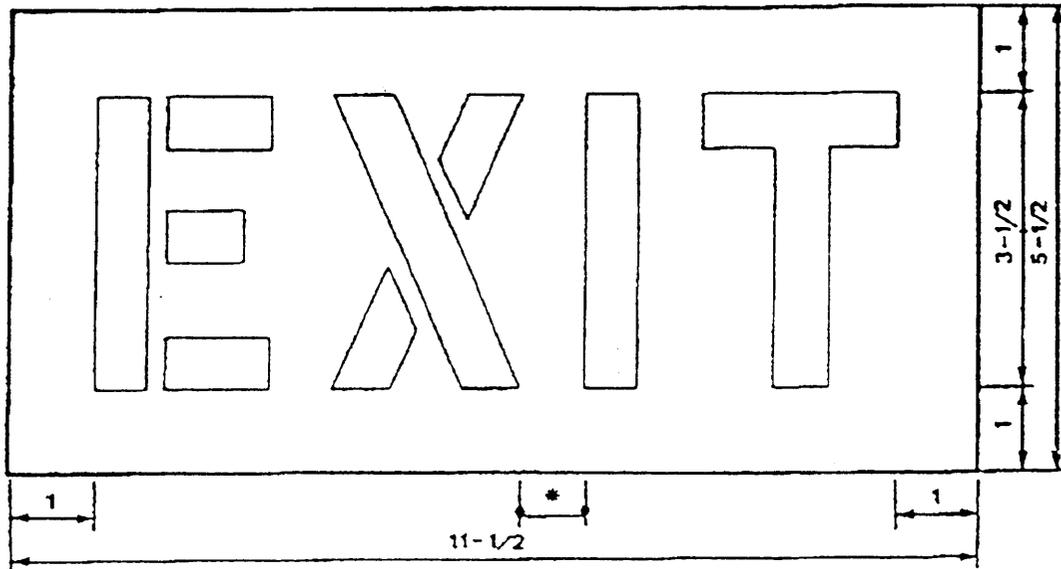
Exit markings for doors and kickout panels along egress routes .
